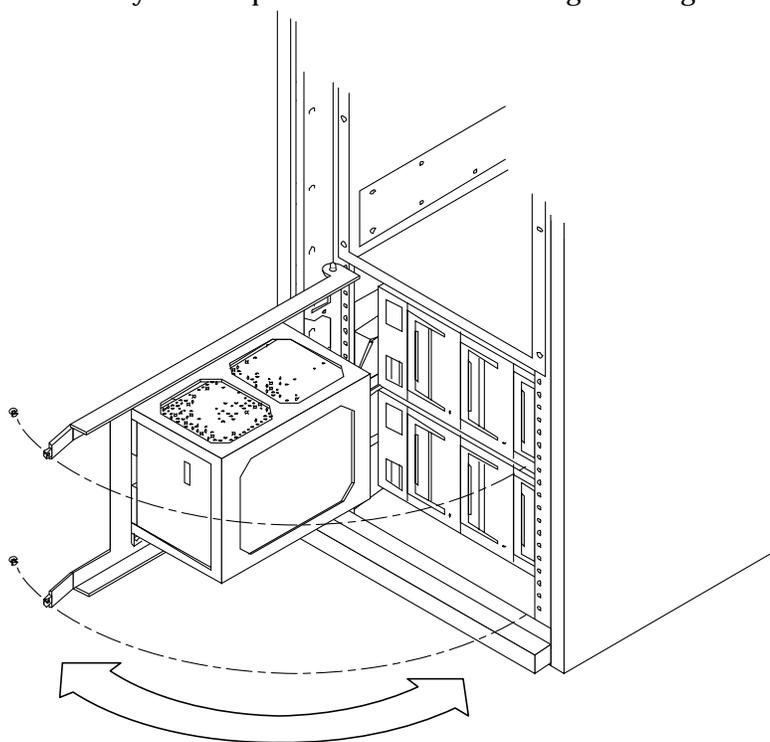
Boot Disk Bracket Installed on the Hinge
